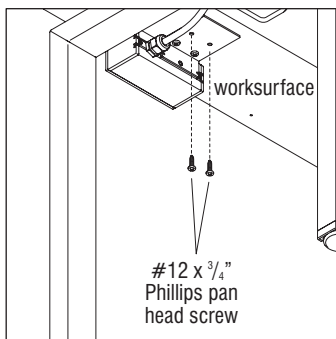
Detail F - Left or Right Aligned Dean Undersurface Mounting Holes - (underside view)
